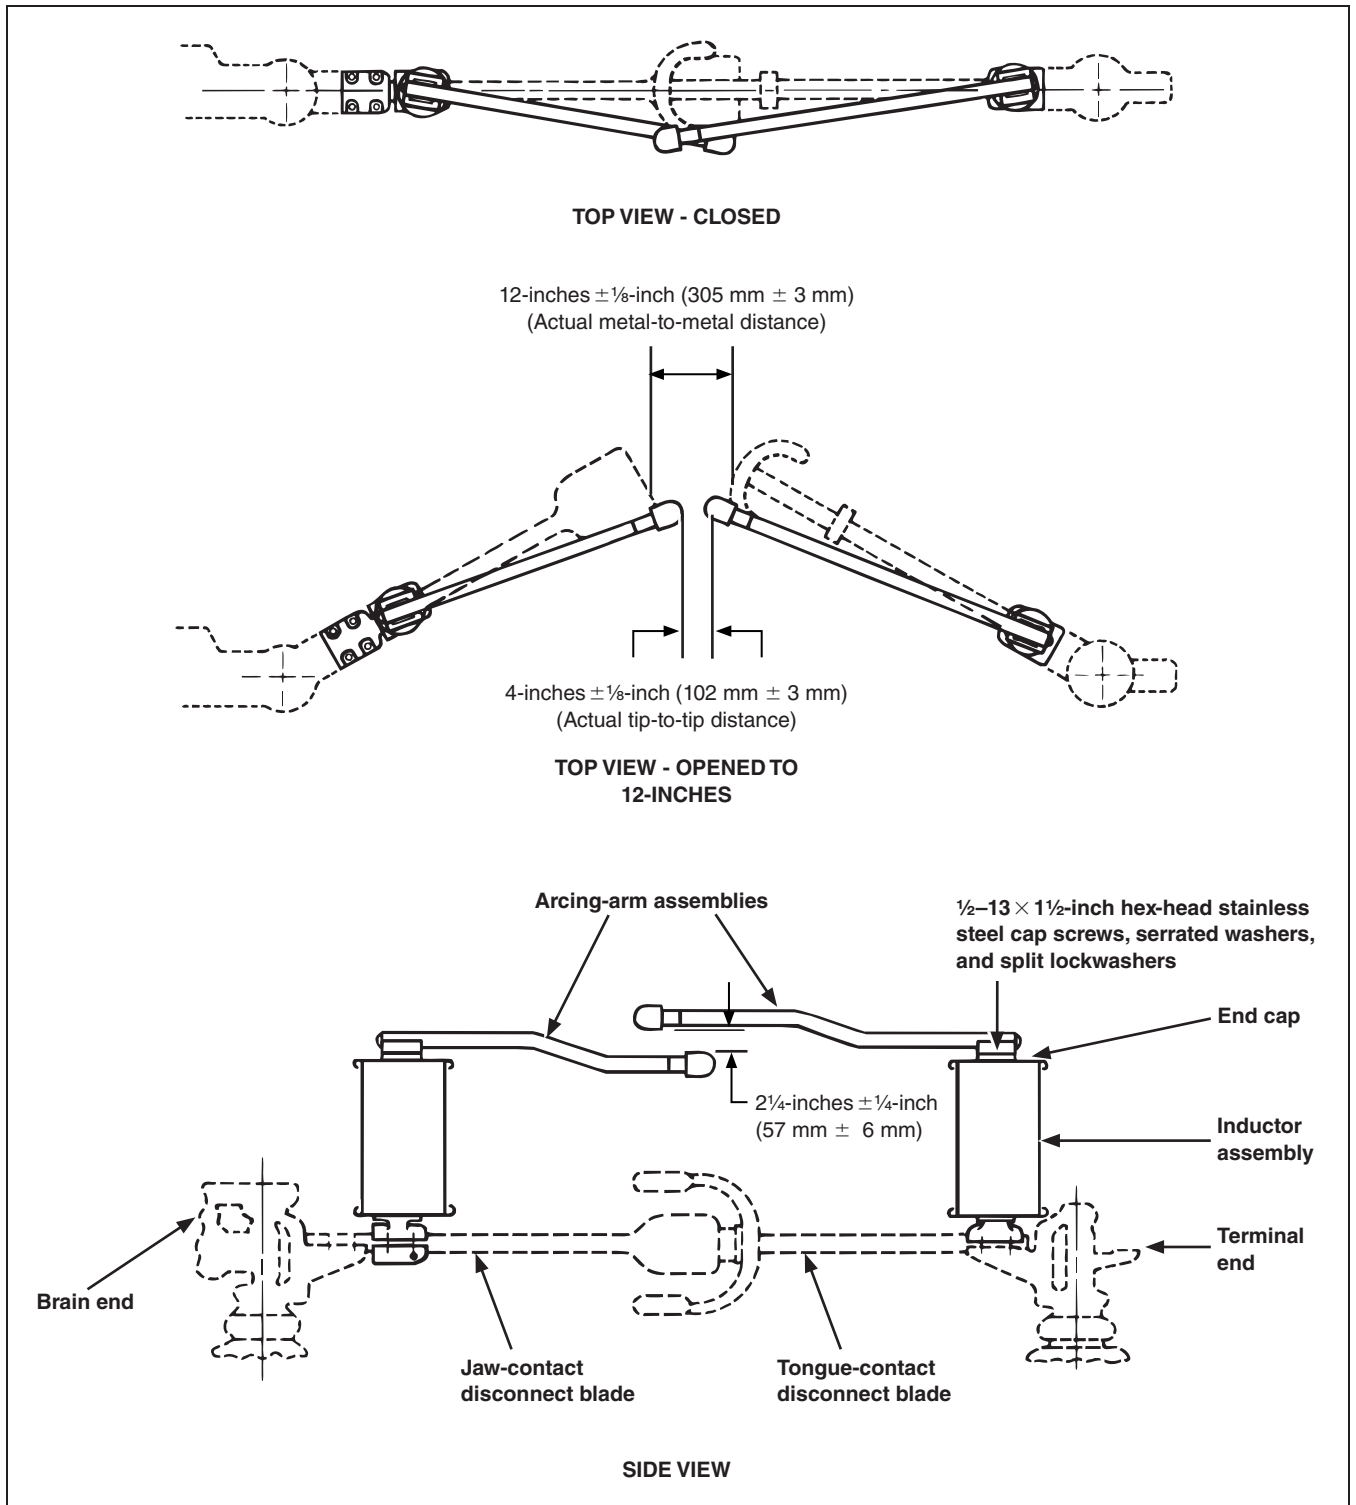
Assembly detail of standard-duty pre-insertion inductors for center-break style circuit-switchers.
